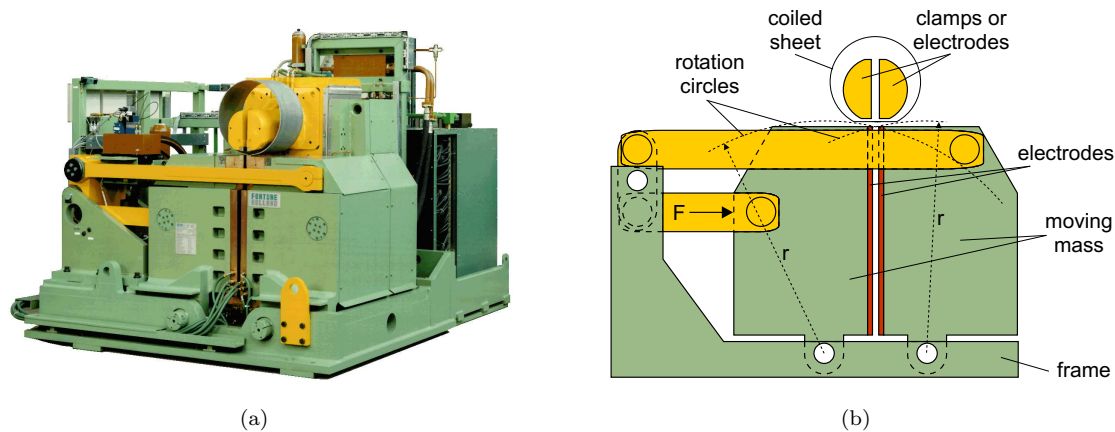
(a): a FRW series welding machine [Fontijne, 2001]. (b): schematic representation of the FRW welding machine with F the force delivered by the hydraulic system.
